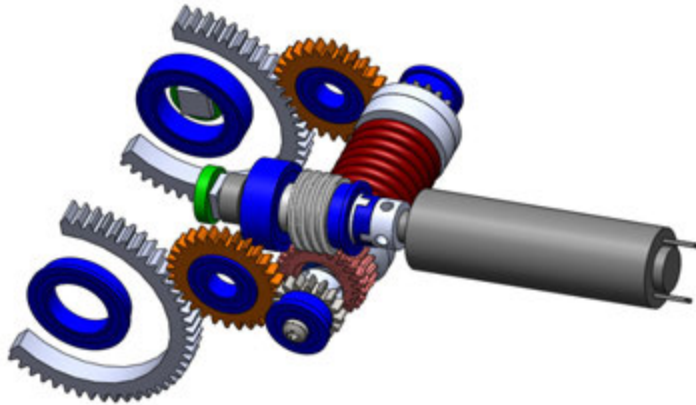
CAD drawing of complete bending gear system showing worm gear, spring and clutch.
